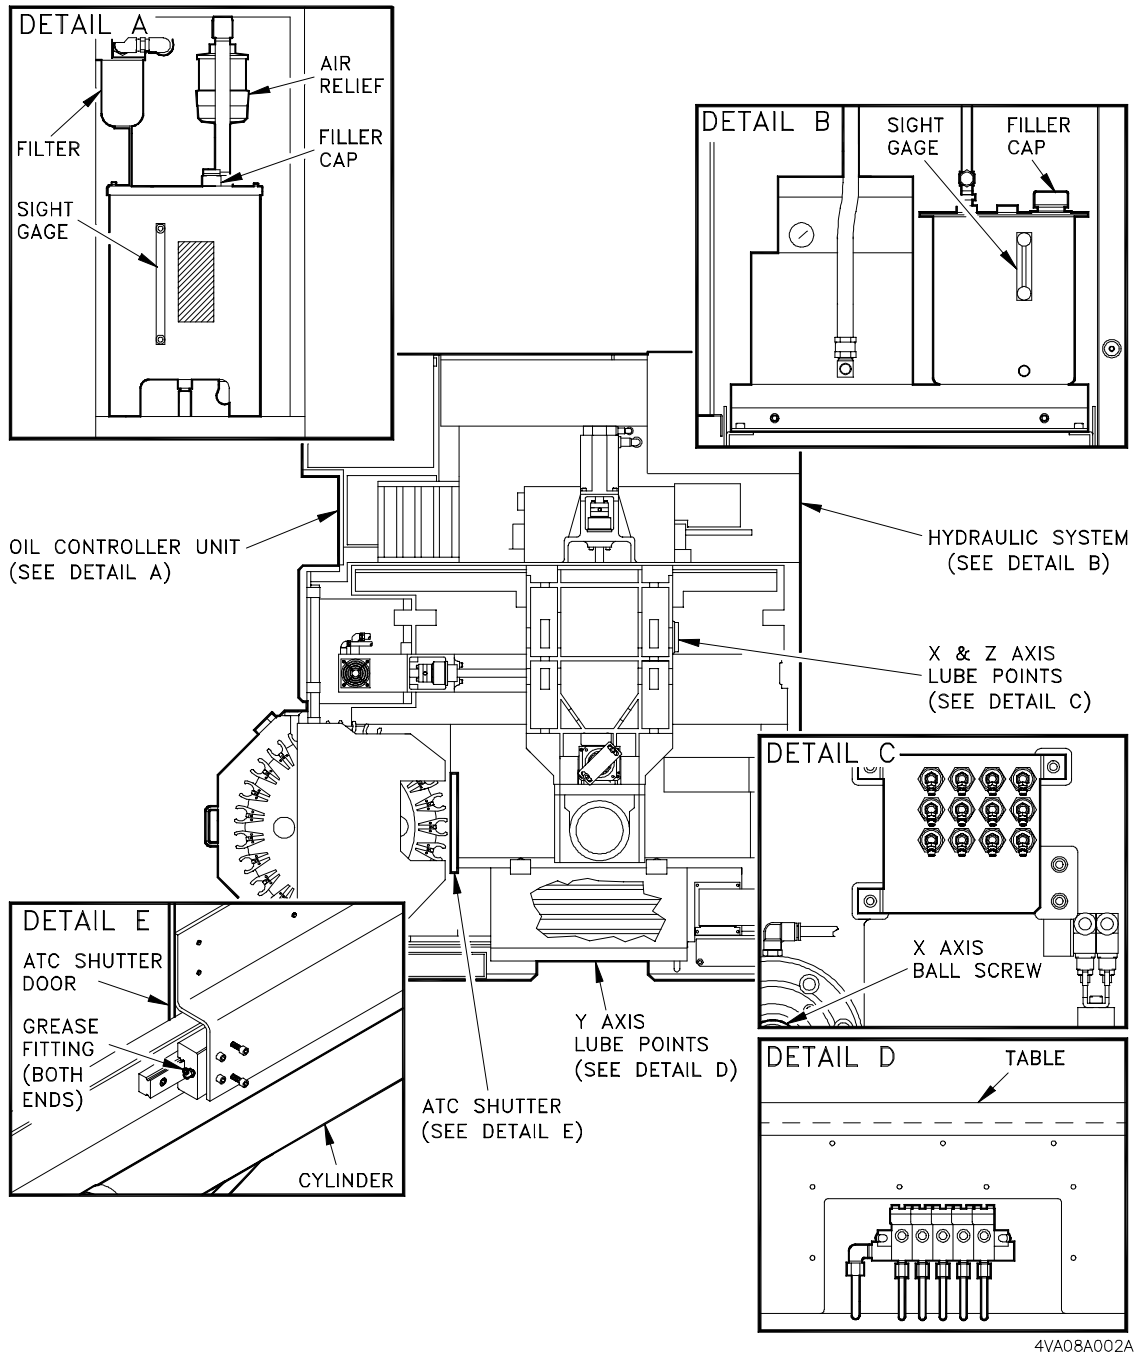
LUBRICATION BREAKOUT DRAWING
